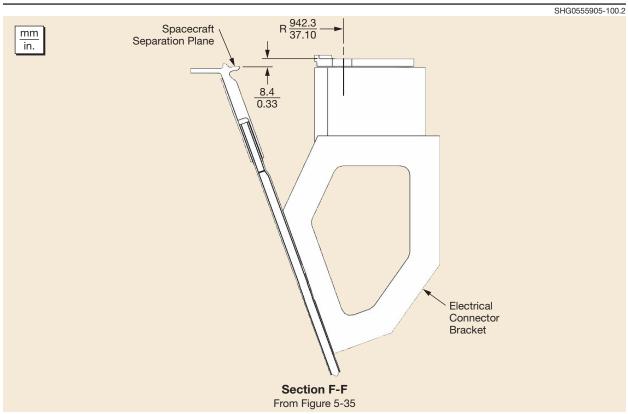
1666-4 PAF Electrical Connector Bracket
